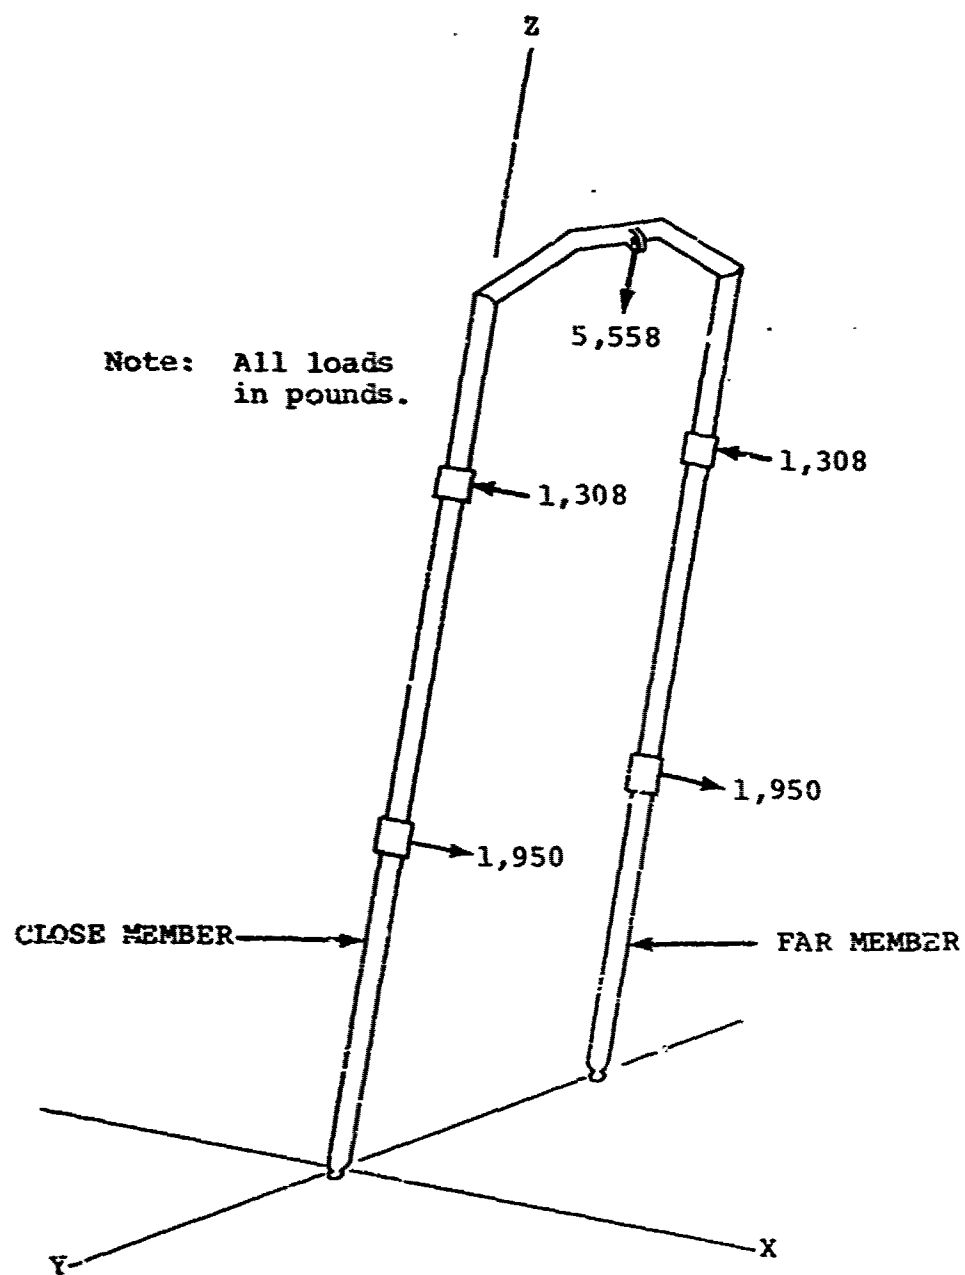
Applied Loading of Guide Frame Assembly - Vertical Loading.
